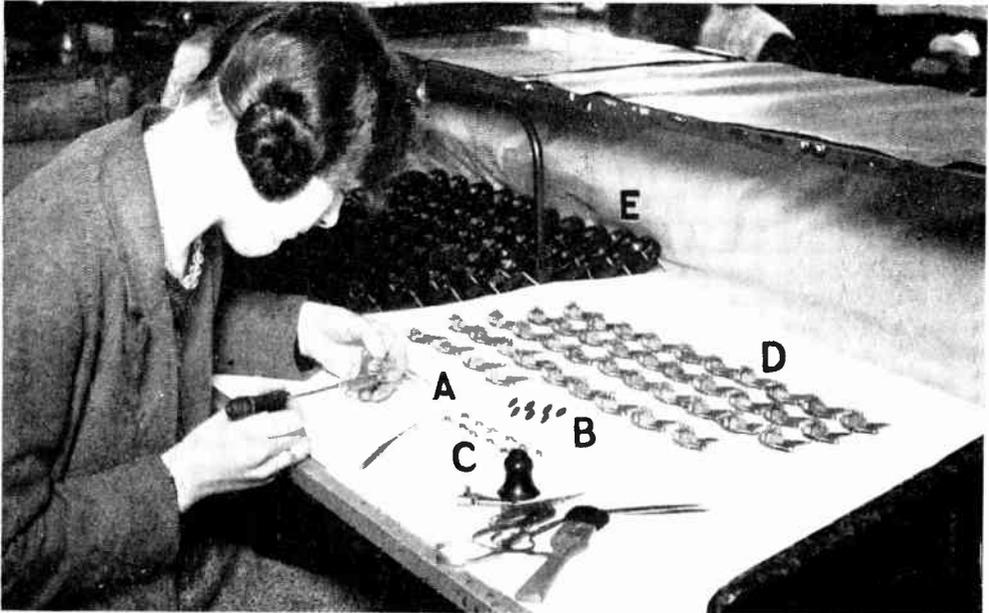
SOLDERING A HAIR SPRING ON TO A " DWARF " MOVING-COIL INSTRUMENT.
